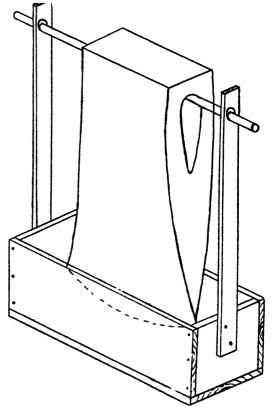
Box Mould, Showing Axe Suspended on Rod
